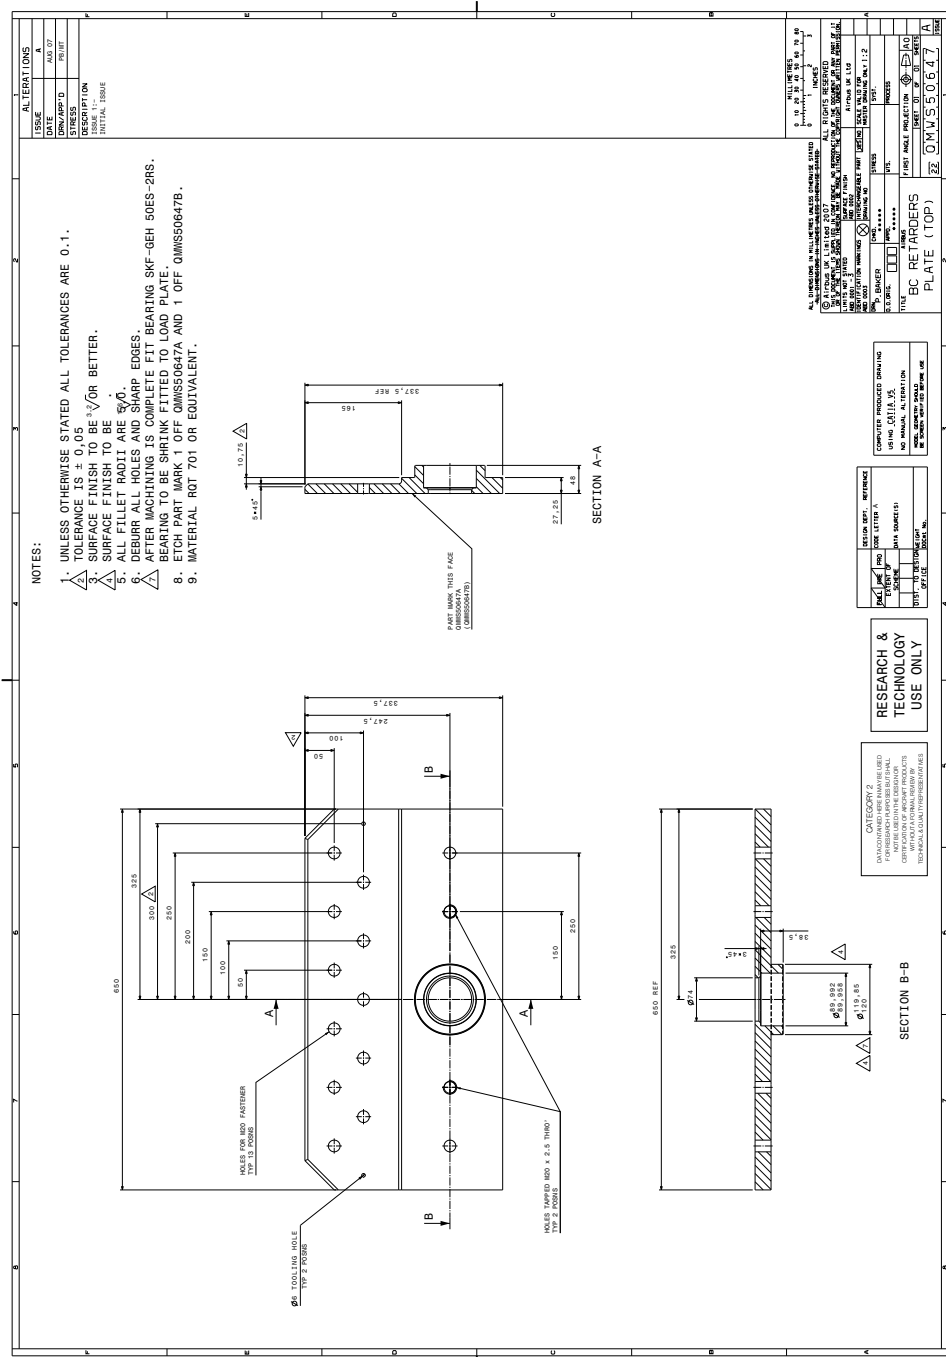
Technical drawing of the top plate of the end fitting. The drawing was provided courteously by Airbus.
